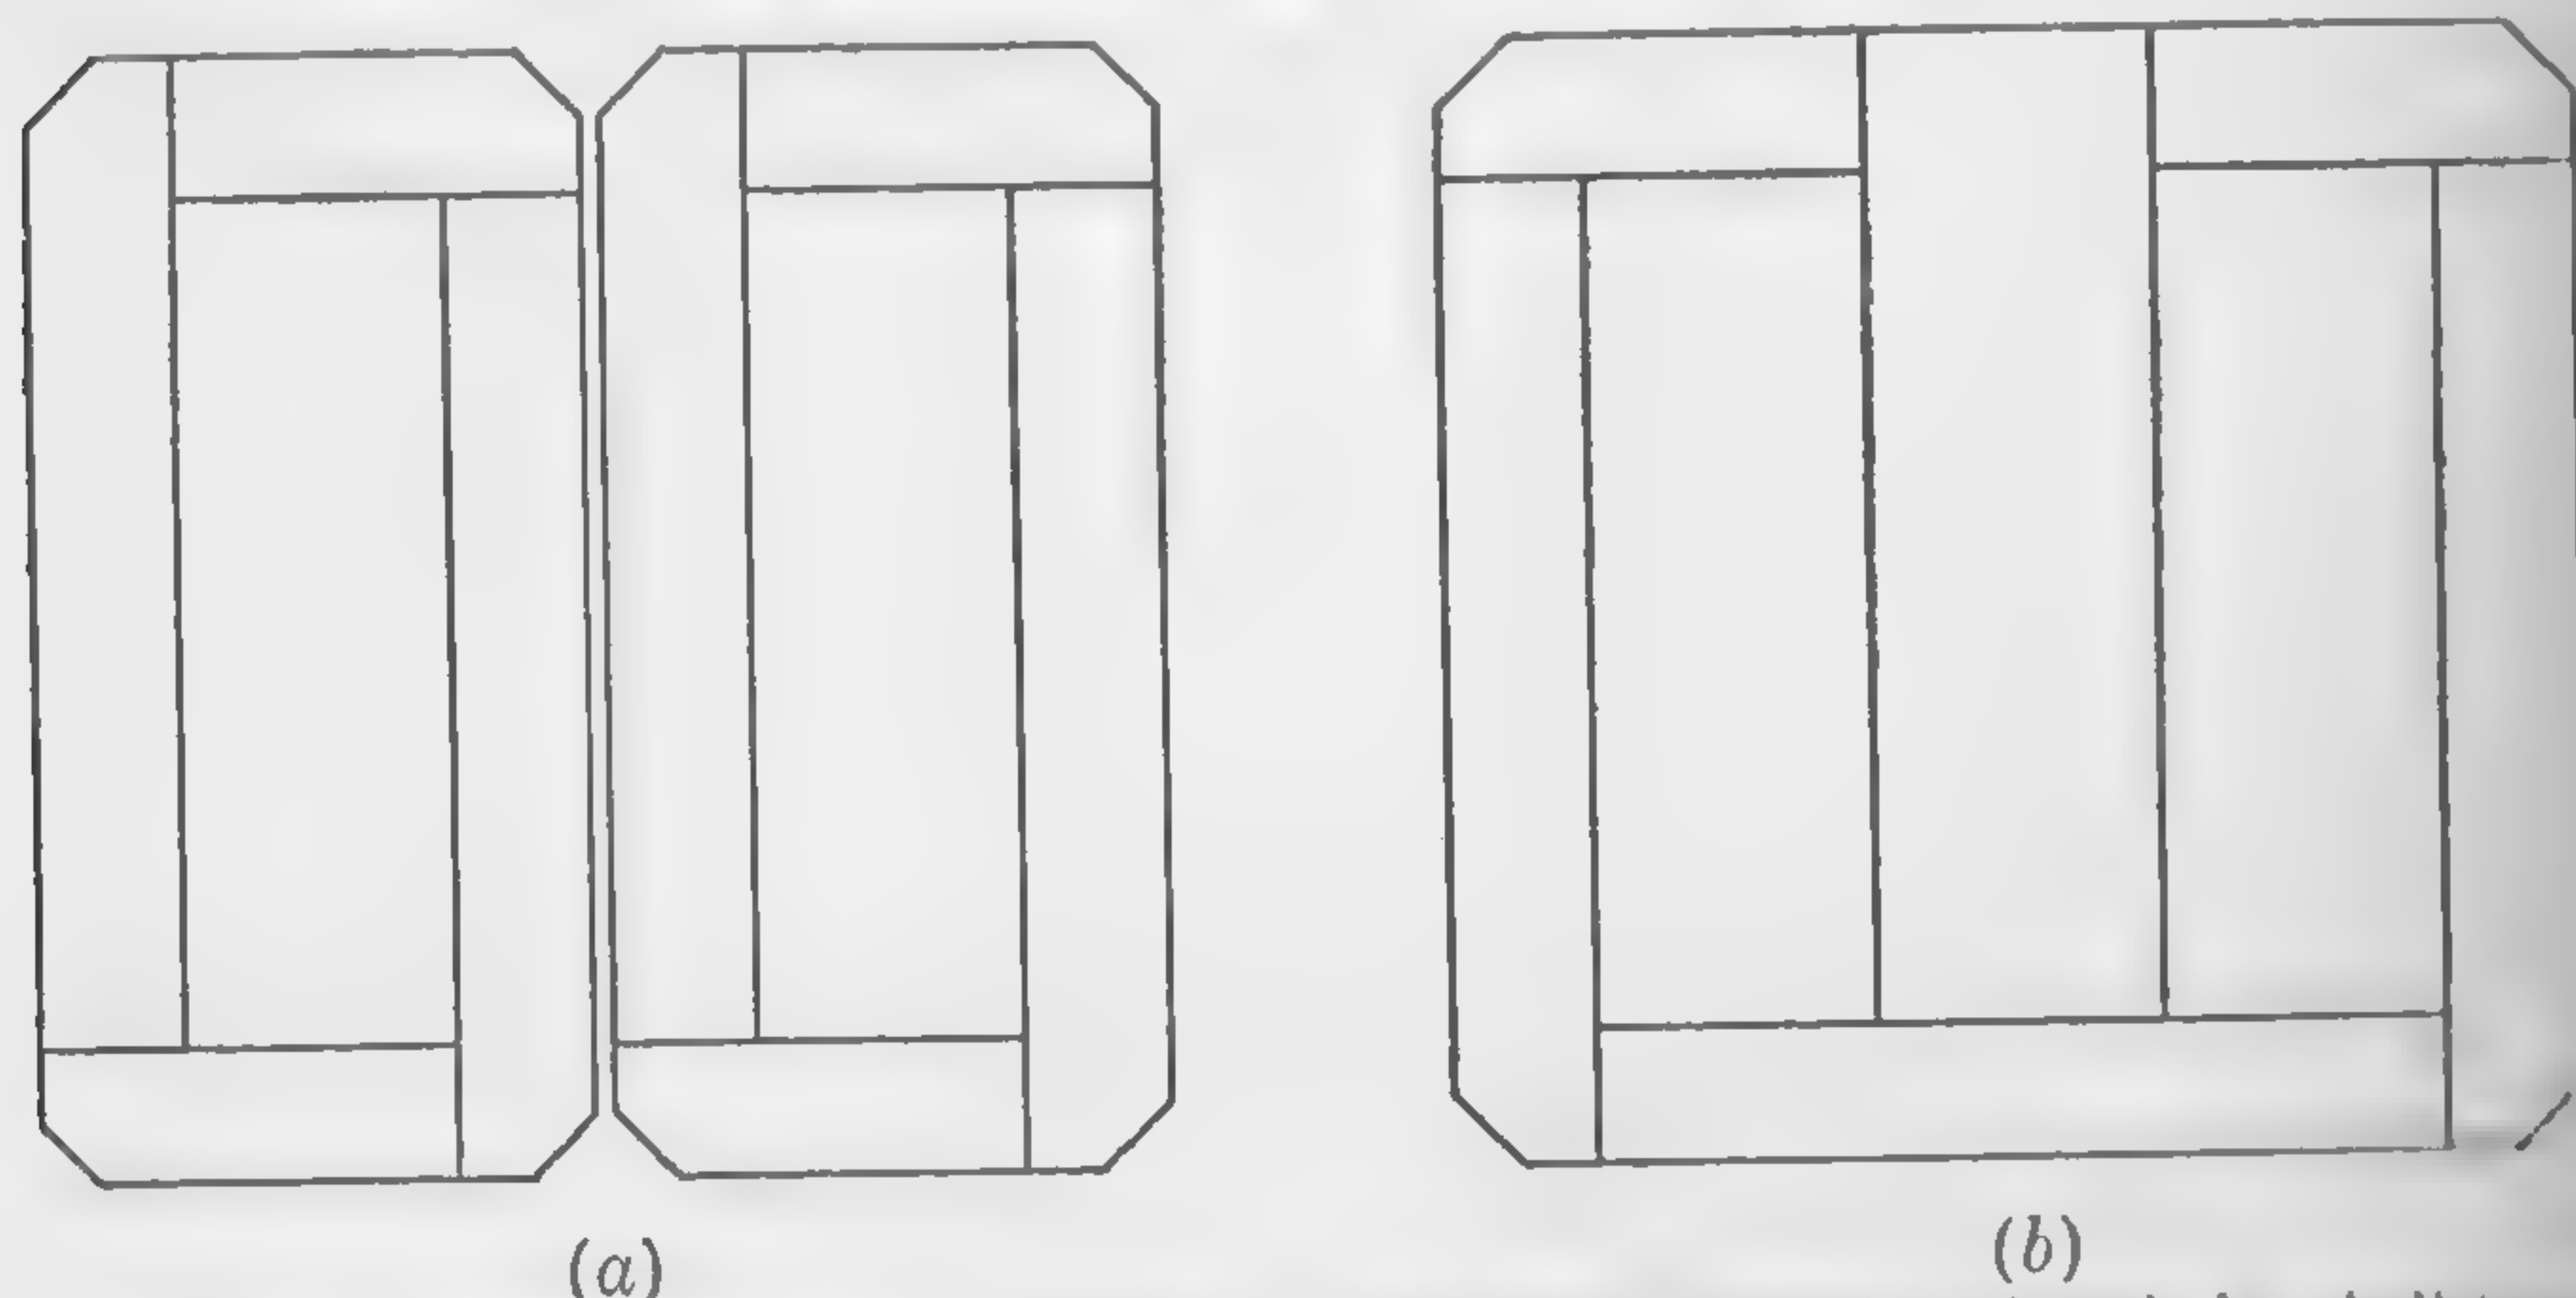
Two methods of assembling stampings (straight pieces) in shell-type transformers.
